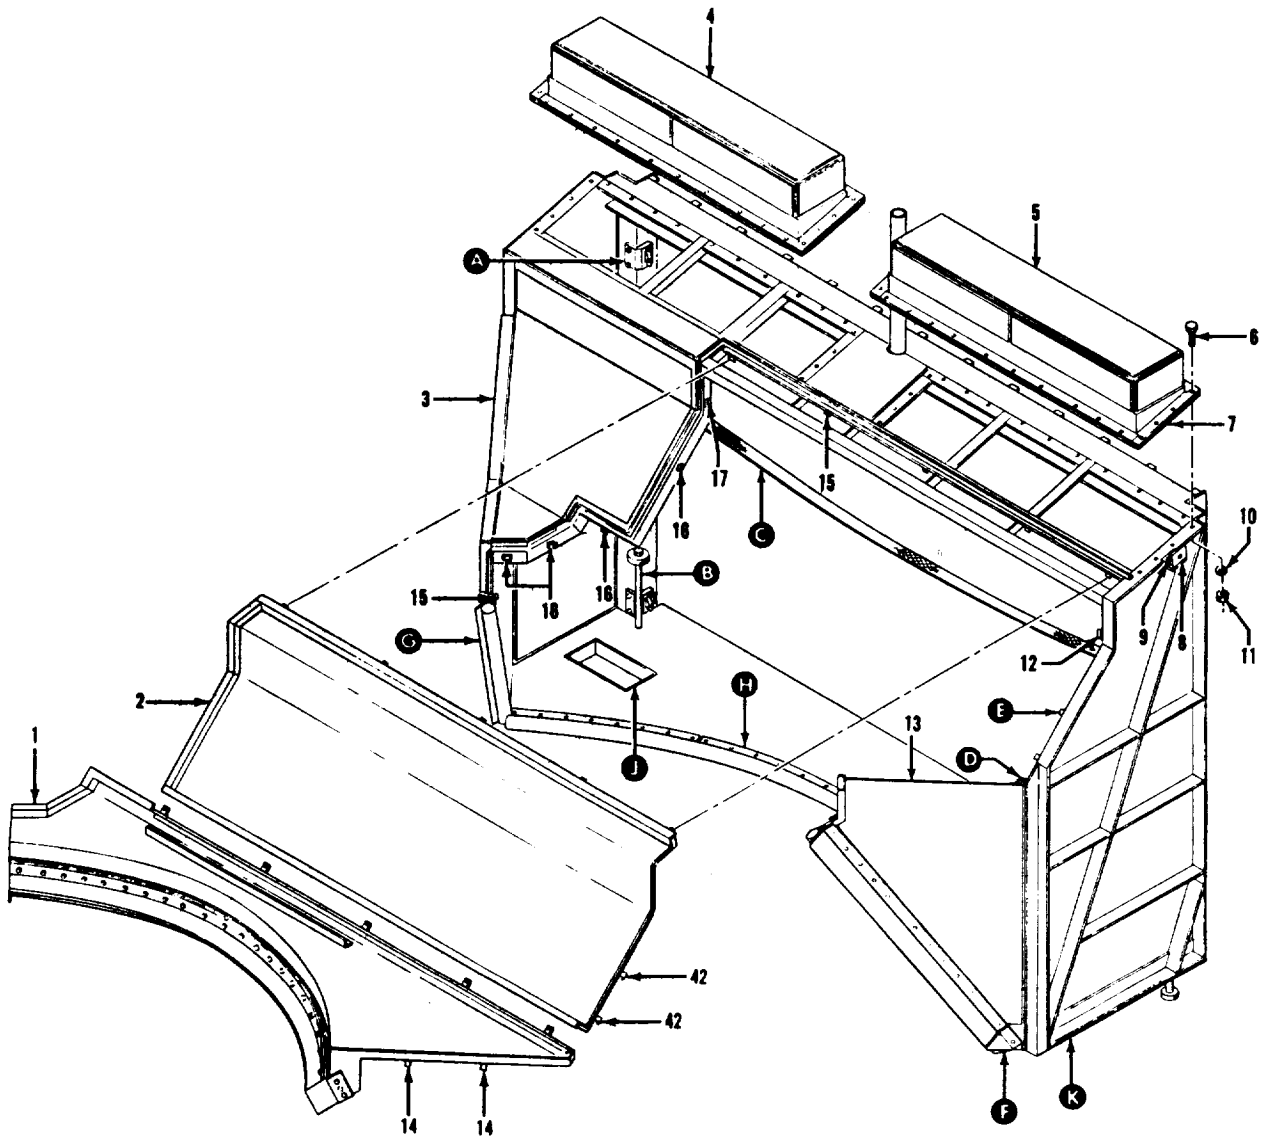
Hood Adapter Assembly (Sheet 1 of 6)
